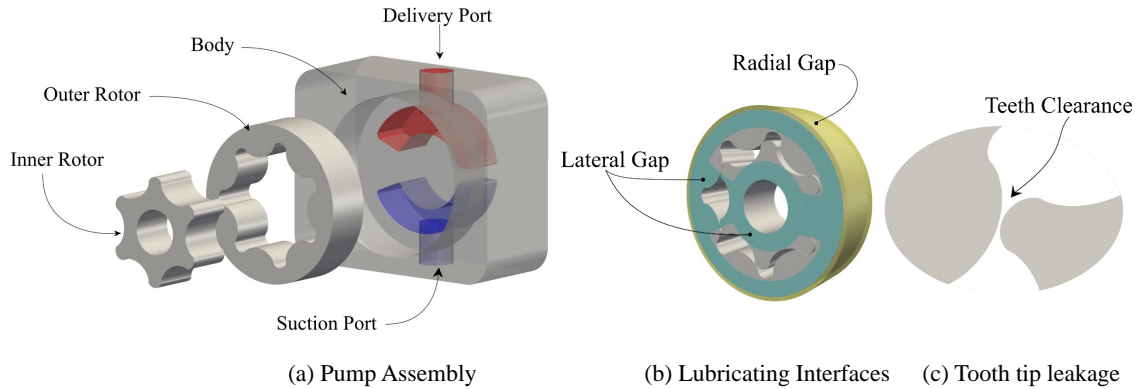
Demonstration of working principal of a Gerotor unit, highlighting loss sources in the machine (a) the assembly of a Gerotor (b) lubricating interfaces in the unit (c) flow constriction at tooth tips
